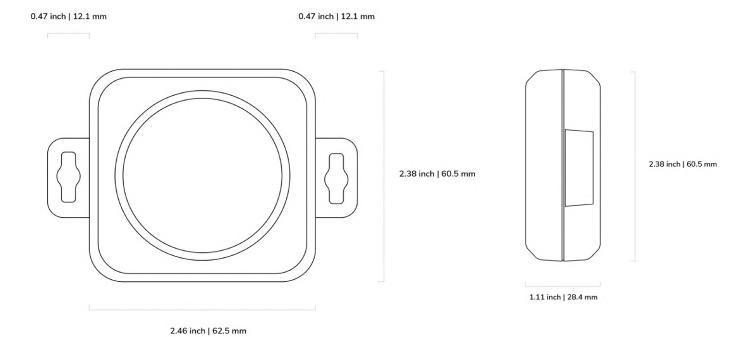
front view of Puck Beacon IP-67 assembly in universal industrial mounting kit
